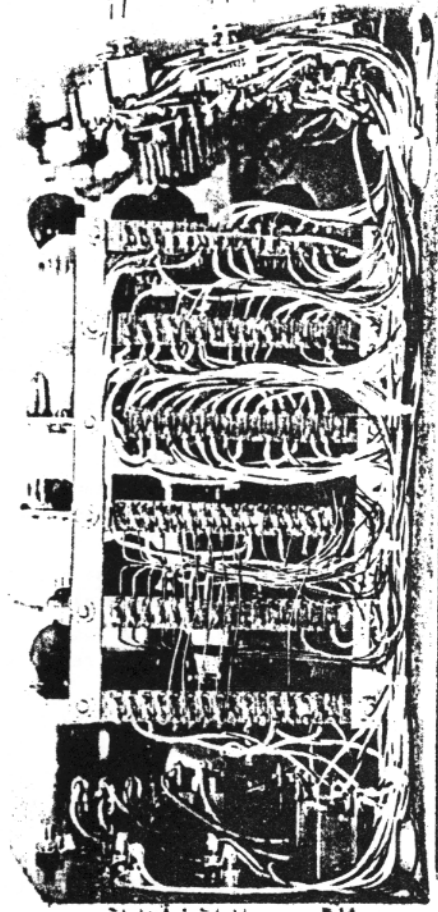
Side view of the IF-2 and UT-4 unit. Using this construction method to mount the edge card connectors is especially nice since it allows easy access to the connector pins.
